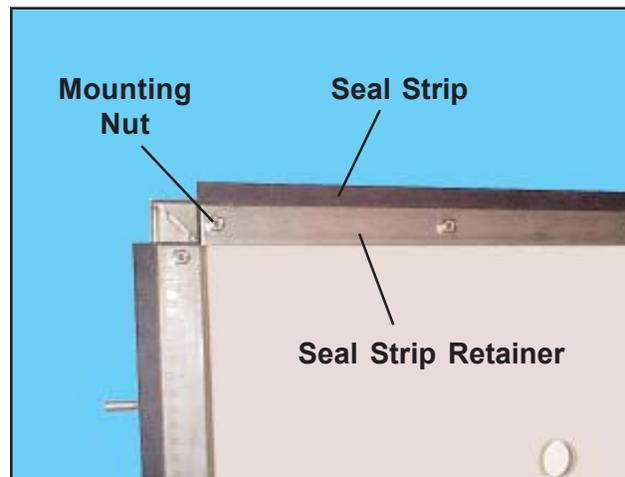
Inside View - Seal Strip Retainer and Seal Strip
